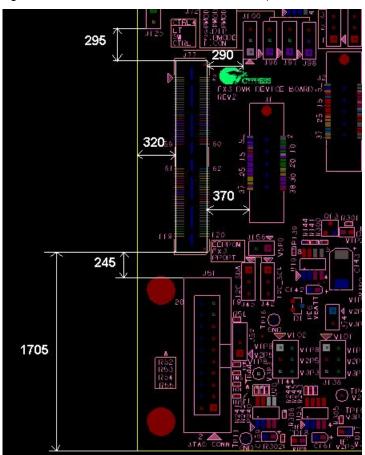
Clearance to Samtec Connector (all dimensions in mils)
